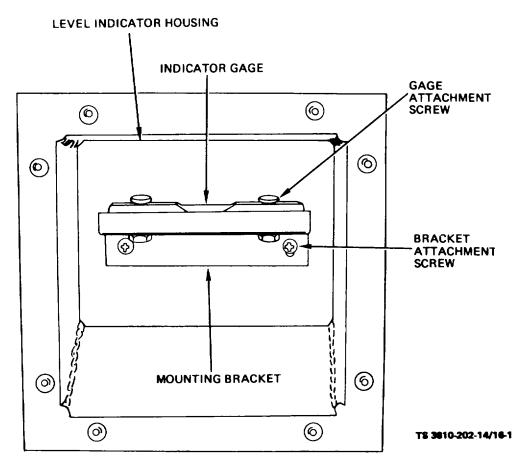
Level Indicator Gage and Housing, Removal and Installation
